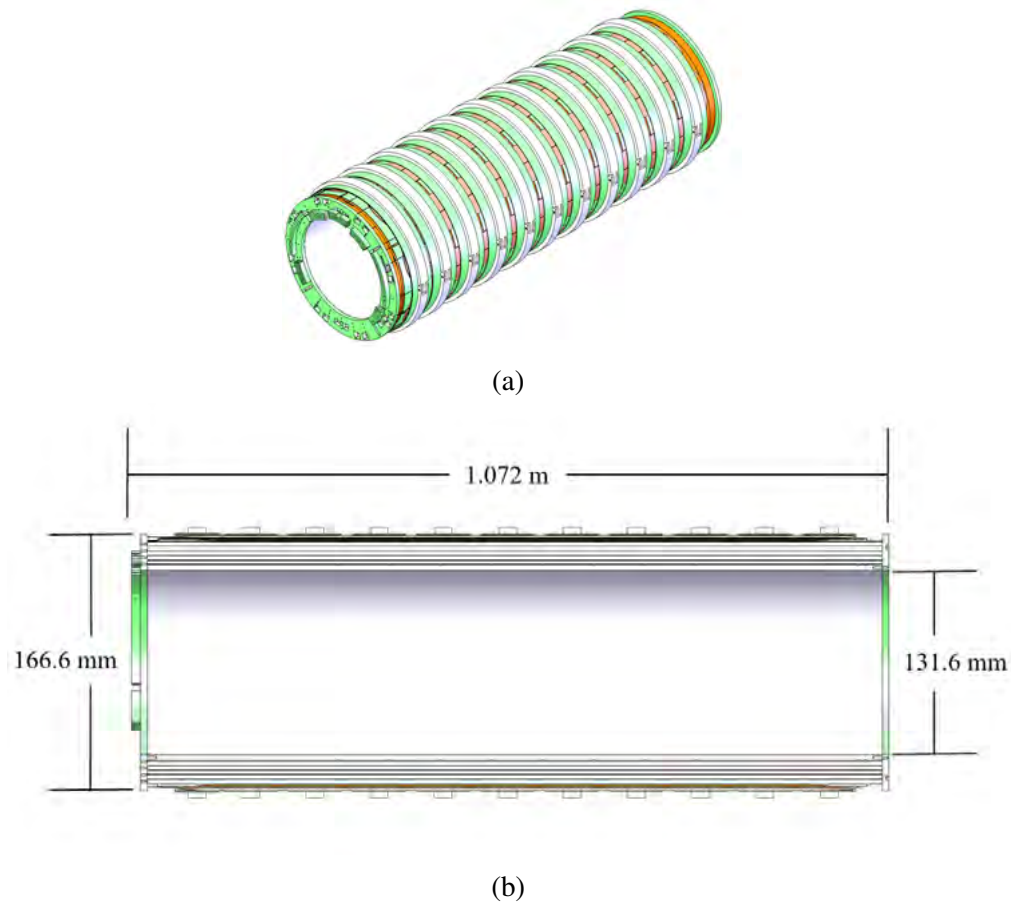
a) Isometric view of conceptual quad package assembled. b) Cross sectional schematic view of conceptual quad package assembled [20].
